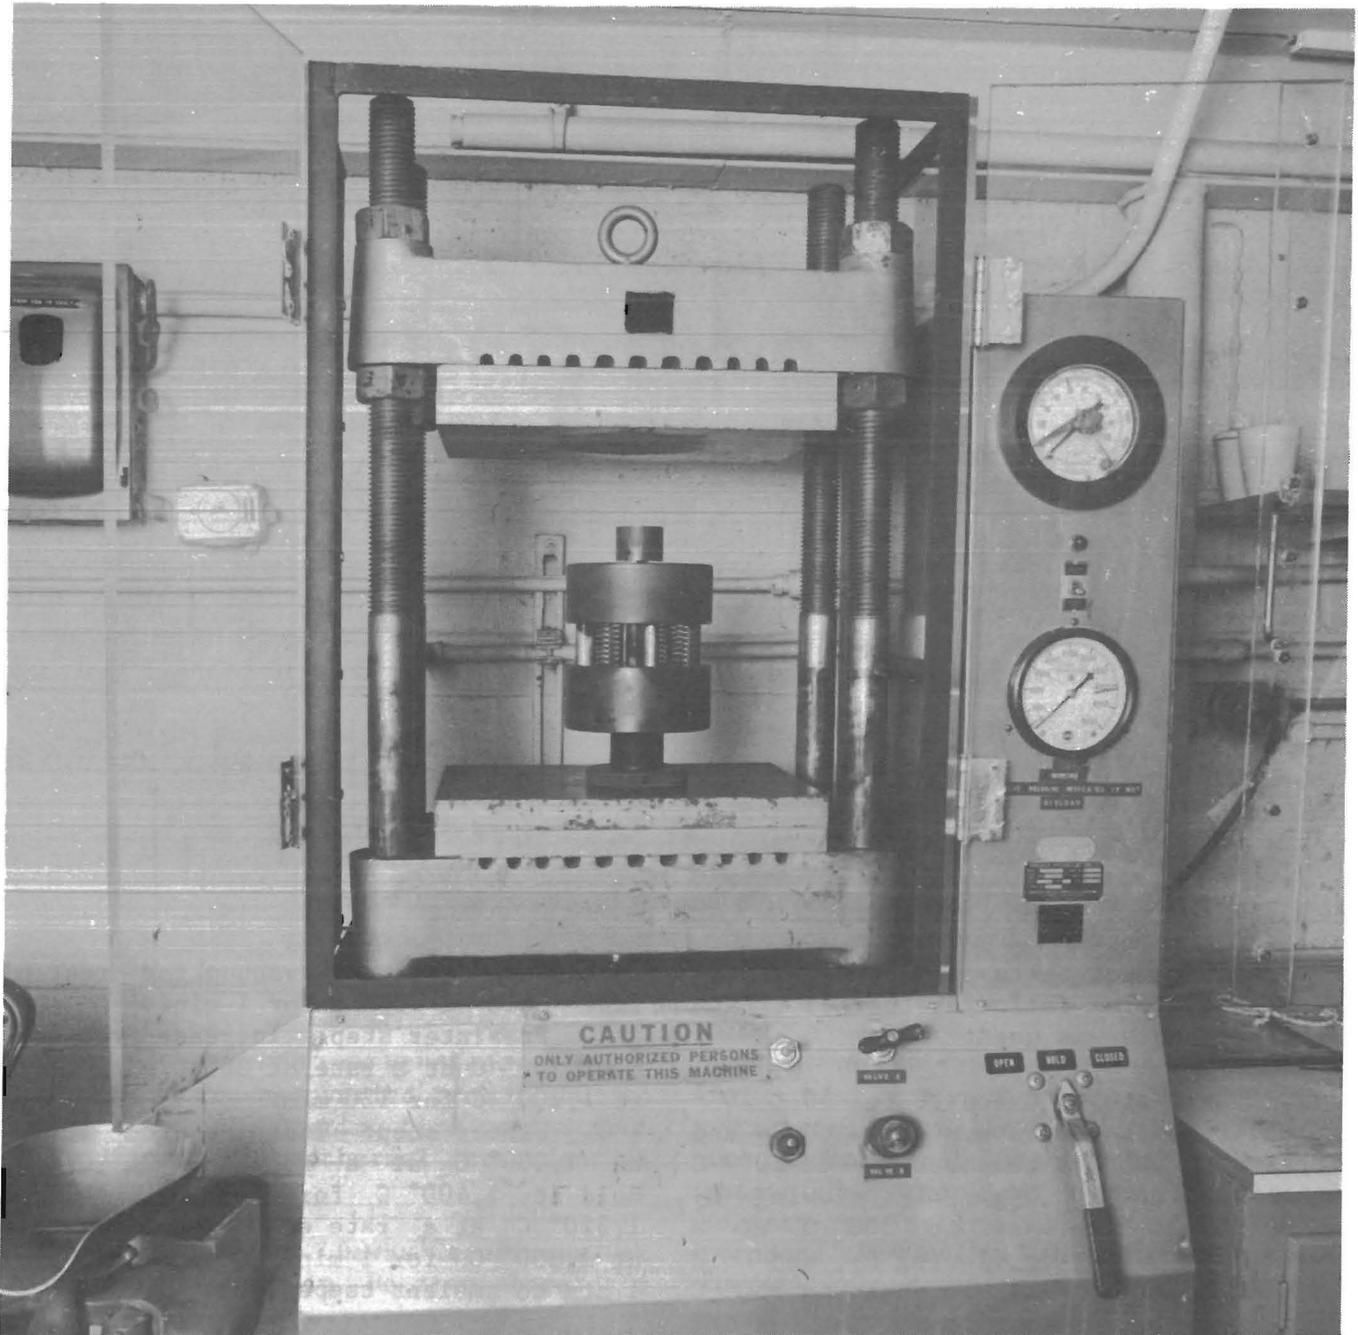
Hydraulic press and die assembly for making powder compact specimens.
